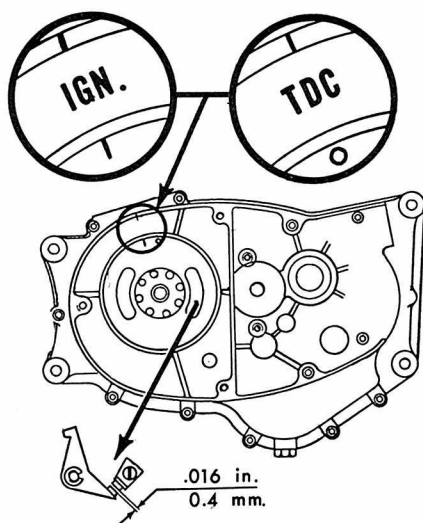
When notch on flywheel is aligned with notch on crankcase, crankshaft is positioned for correct ignition point. When "O" on flywheel is aligned with notch in crankcase, piston is at TDC.
